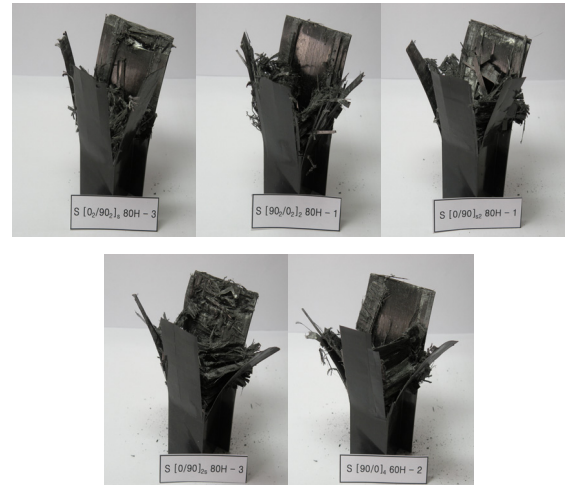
Collapsed shaped of CFRP hat-shaped sectional members (outer angle 0°, 80 °C specimen)
